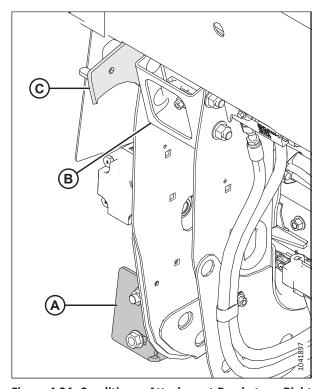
Conditioner Attachment Brackets — Right Side Shown
